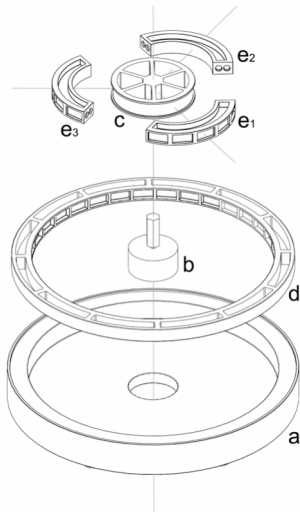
Experimental apparatus; a) base, b) motor, c) rotor head, d) outer ring, e) inner ring sections
